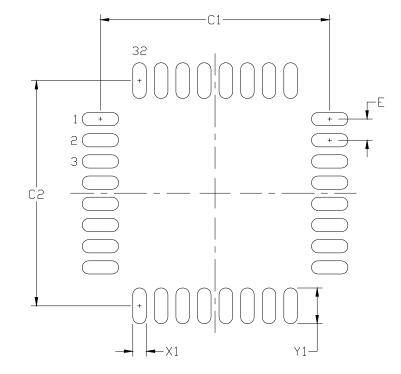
LQFP-32 Recommended PCB Land Pattern
